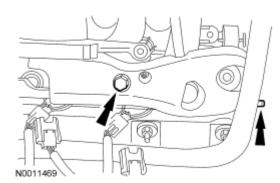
Intake Manifold Bolts Courtesy of FORD MOTOR CO.
